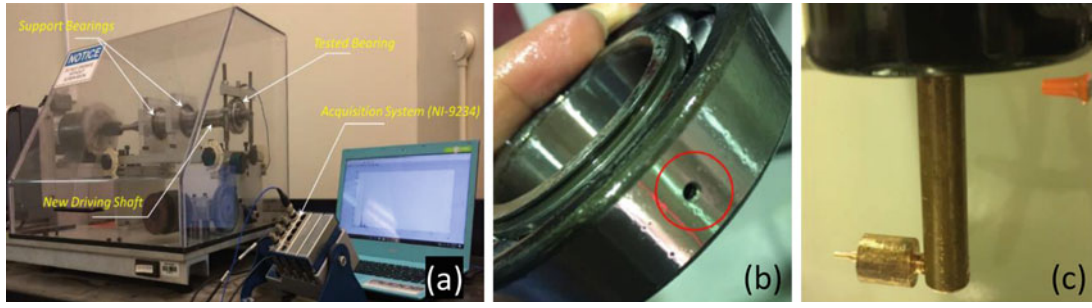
(a) Bearing experimental setup; (b) outer ring bearing defect; (c) machining equipment
